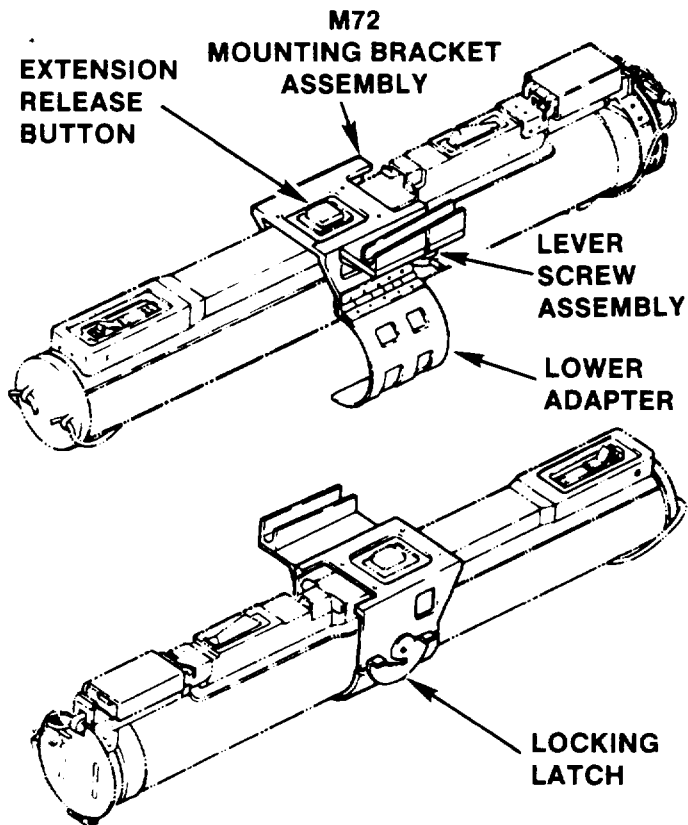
Installation of Mounting Bracket Assembly, M72A1.
